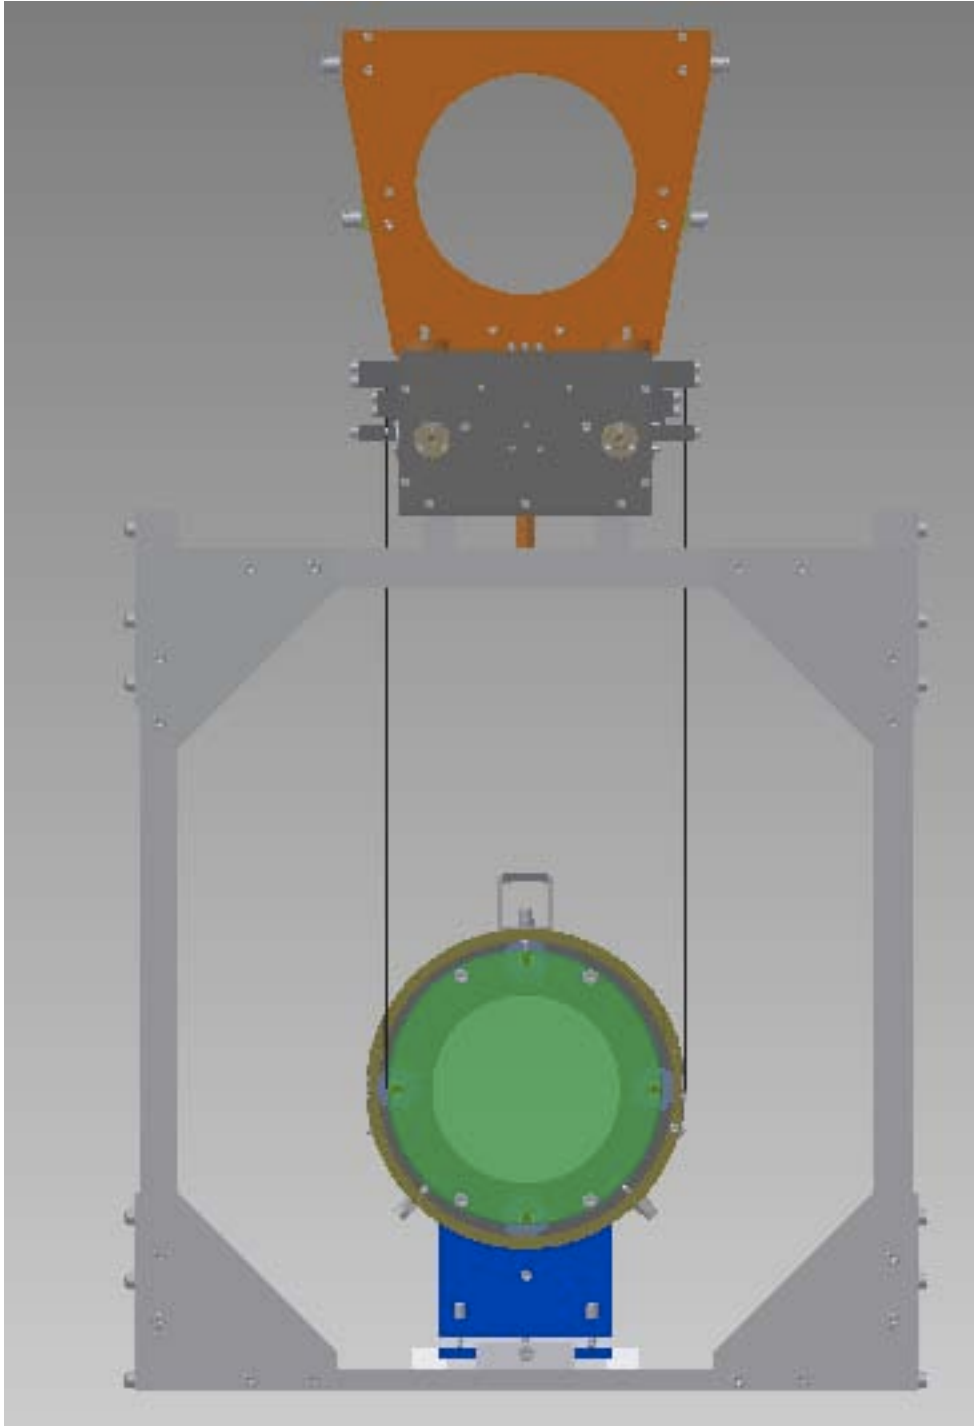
The recoil mass on its stand is pushed forward, surrounding the mirror. After wiring the recoil mass the wires are cut below the winches, the winch box removed
